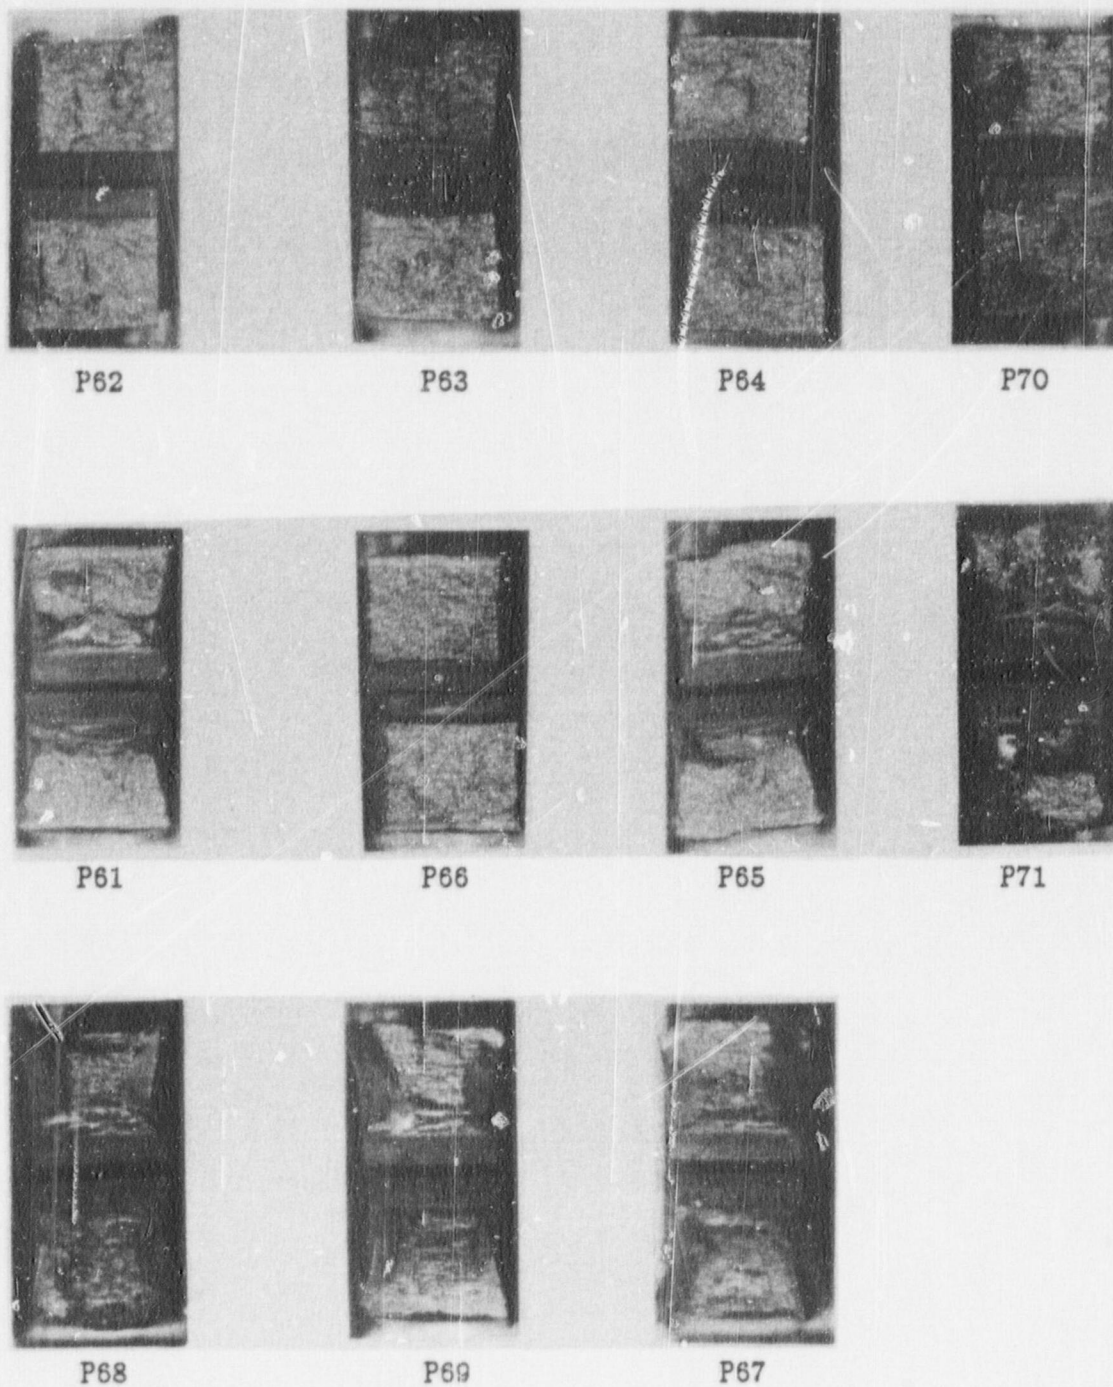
Charpy Impact Specimen Fracture Surfaces for Kewaunee Reactor Vessel Shell Forging 122X203 VA1 (Tangential Orientation)
